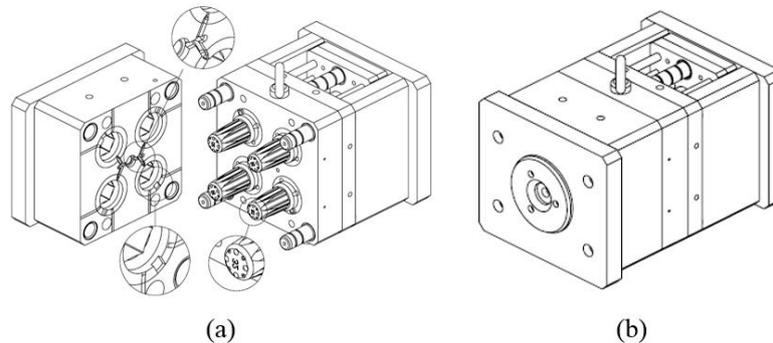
Capa Porca Belga 32: a) open mold – details of the feed channels and gas outlets; b) closed mold.
